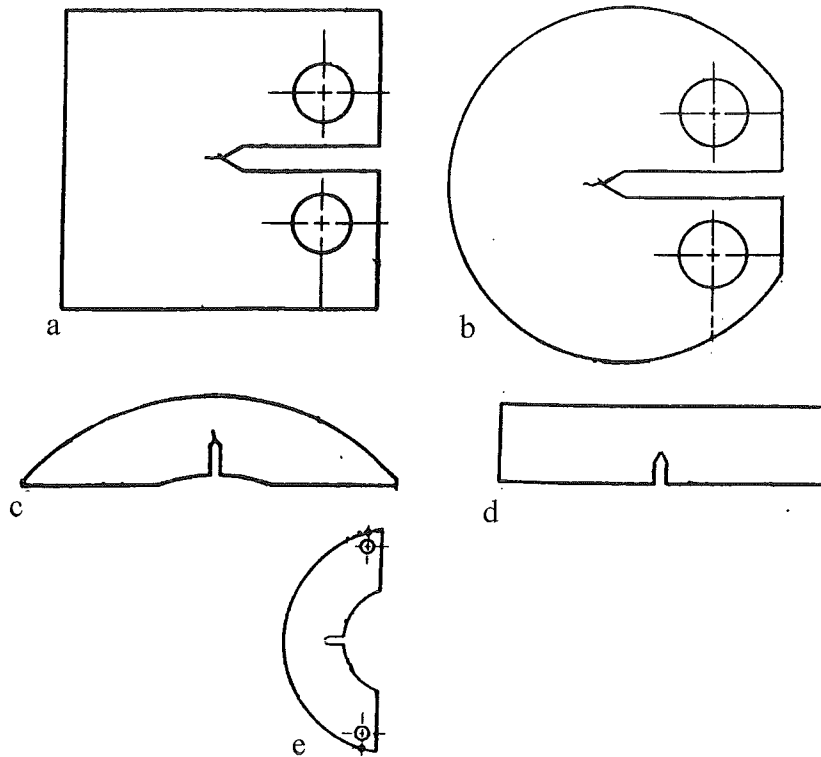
(a) compact tension specimen (b) disk-shaped compact tension specimen (c) arc-shaped bend specimen (d) bend specimen (e) arc-shaped tension specimen [23]
